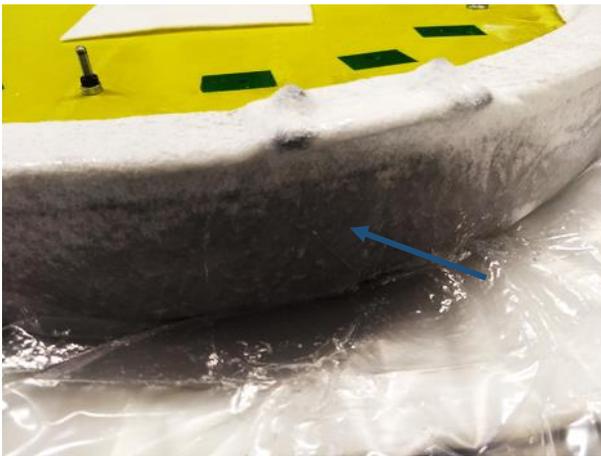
The resin leaked into the breather fabric through gaps between the outer mould and inner mould, and gaps in the outer mould itself.
